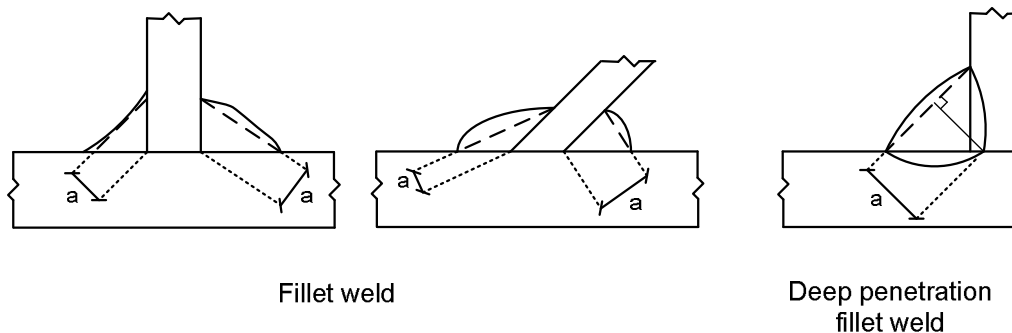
Throat thickness of a (deep penetration) fillet weld.
